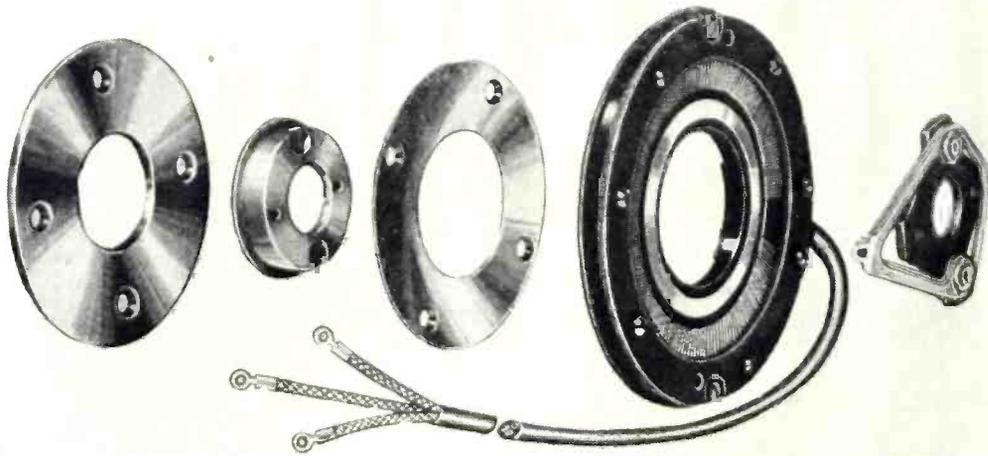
Exploded view of the potentiometer assembly used in various controls.
